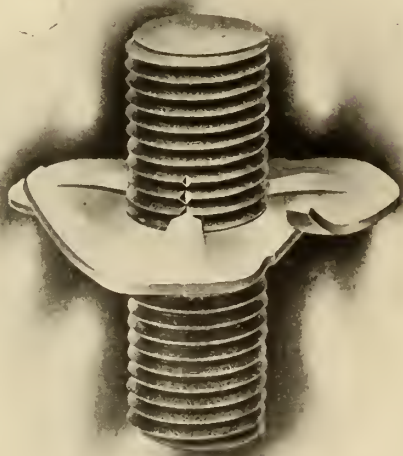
Clark Nut-Lock, Nut Having Been Screwed on and Removed.
